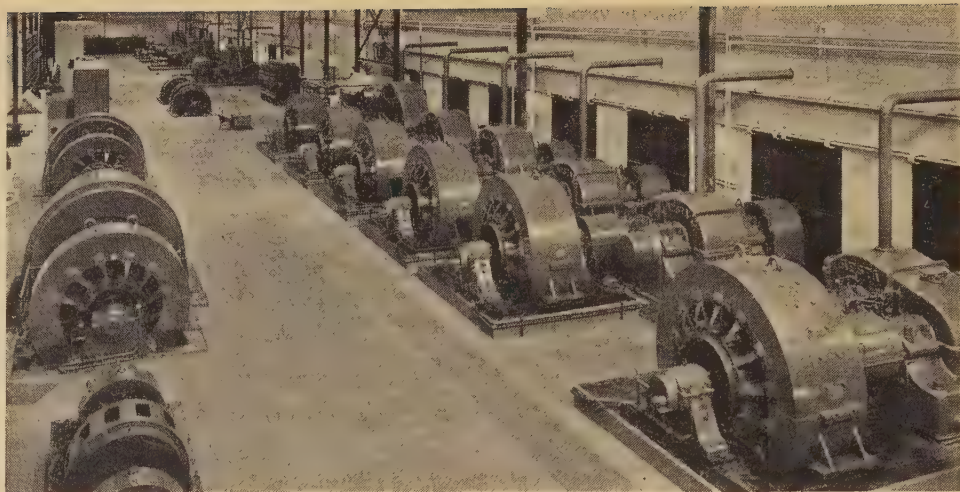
View of the motor room of a modern 56-inch continuous hot-strip mill from the finishing end
